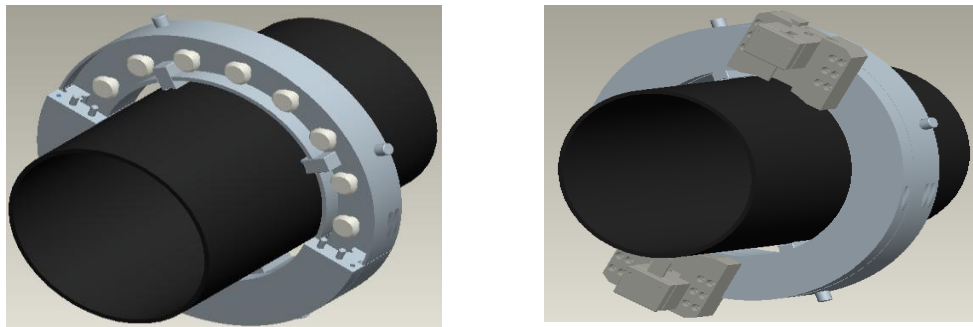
Assembly drawing of (a) Sectional view assembly (b) Full assembly.
